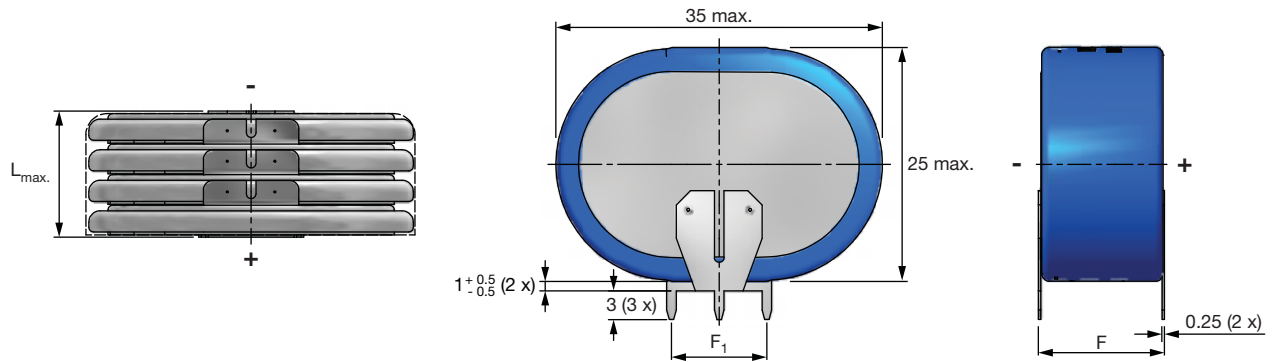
Form G: Stacked Through Hole Oval (PCBD)
